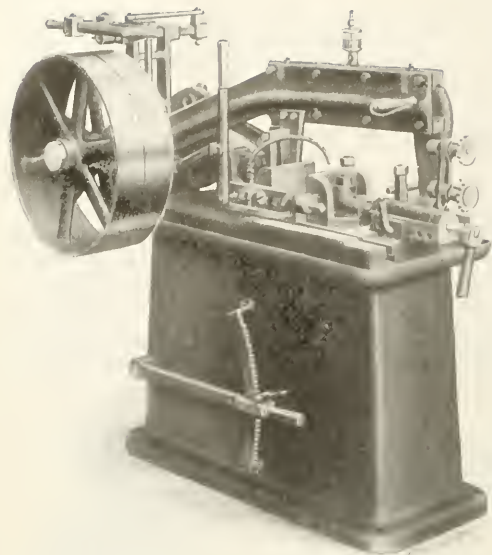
Opposite Side of Hacksaw shown in Fig. 1
